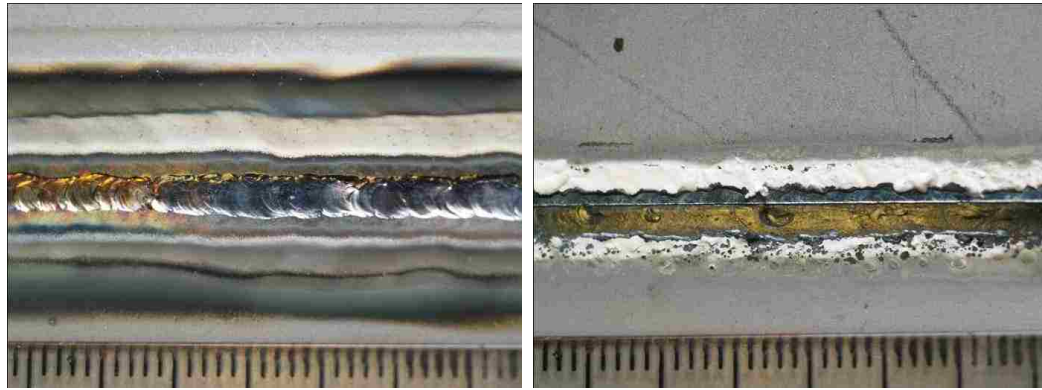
6.2 shows the top and bottom views of the TIG-welded butt joints obtained in experiments. There was no splatter and porosity from welding with the GTAW welding process. A sound weld with complete penetration was achieved and continuous without the presence of spatter or porosity.
